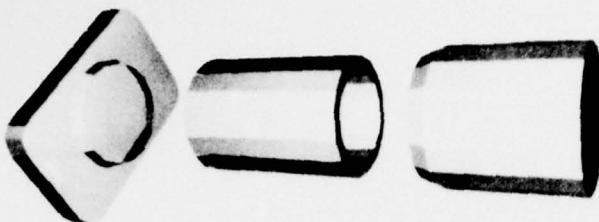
Exploded View of Transducer Components (Unsmoothed)
